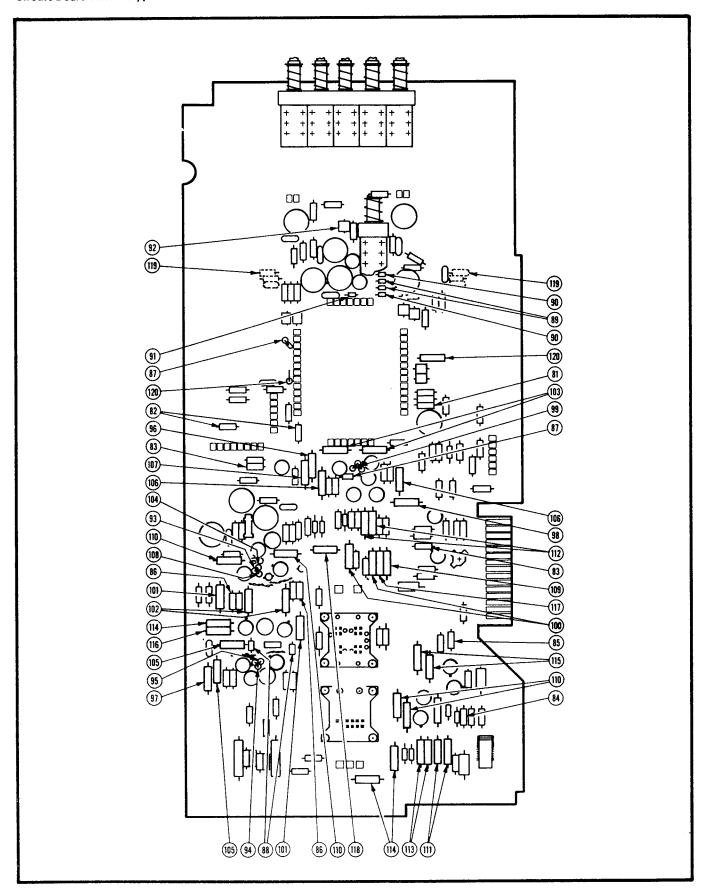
Circuit Board Assembly, Vertical (Sheet 3 of 4).
